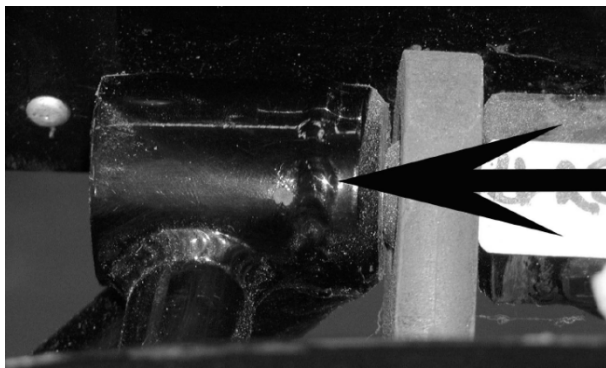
Original Engine Mount Weld Indicates Two (2) Piece Foot
